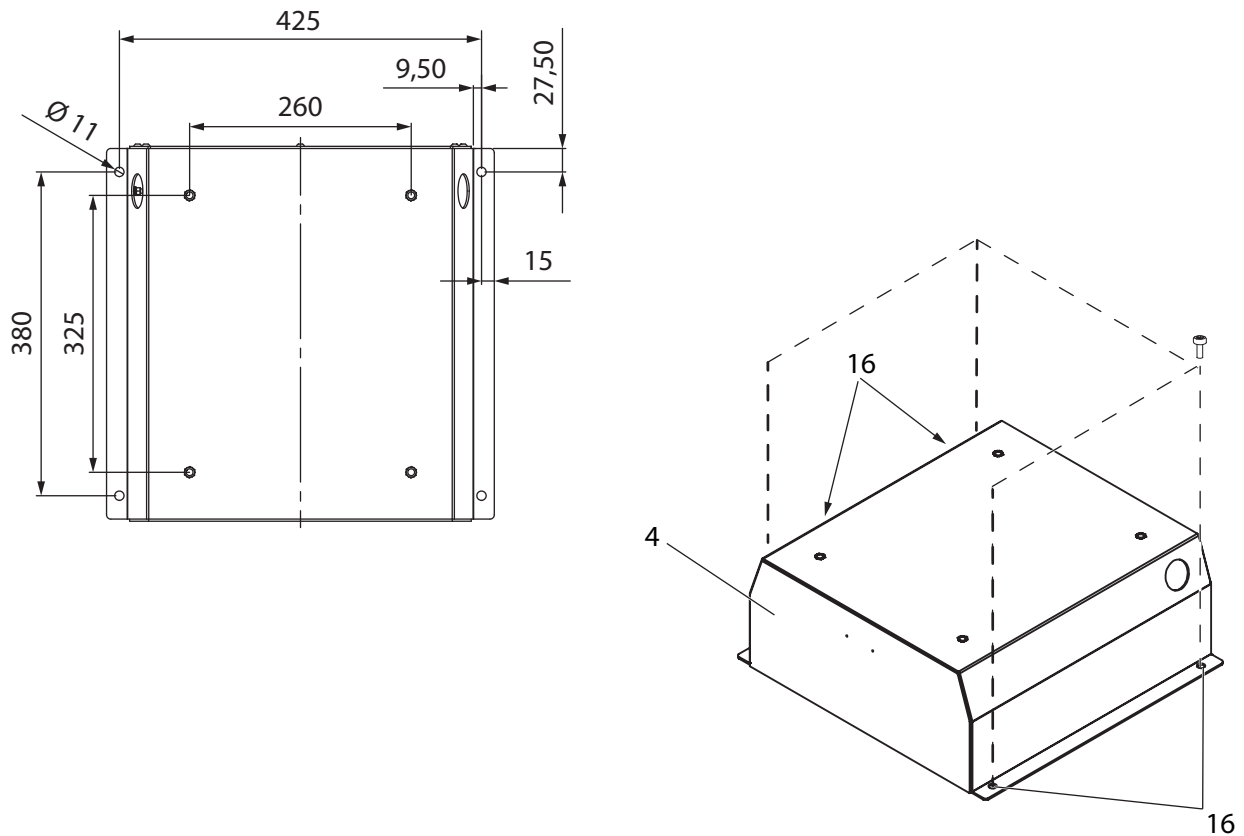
Mechanical installation – spacer 52832; 43666; 53153 (dimensions in mm)
